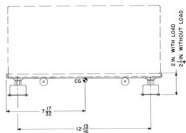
51S-1B Receiver, Outline and Mounting Dimensions with 250D-5 Base Shockmount
